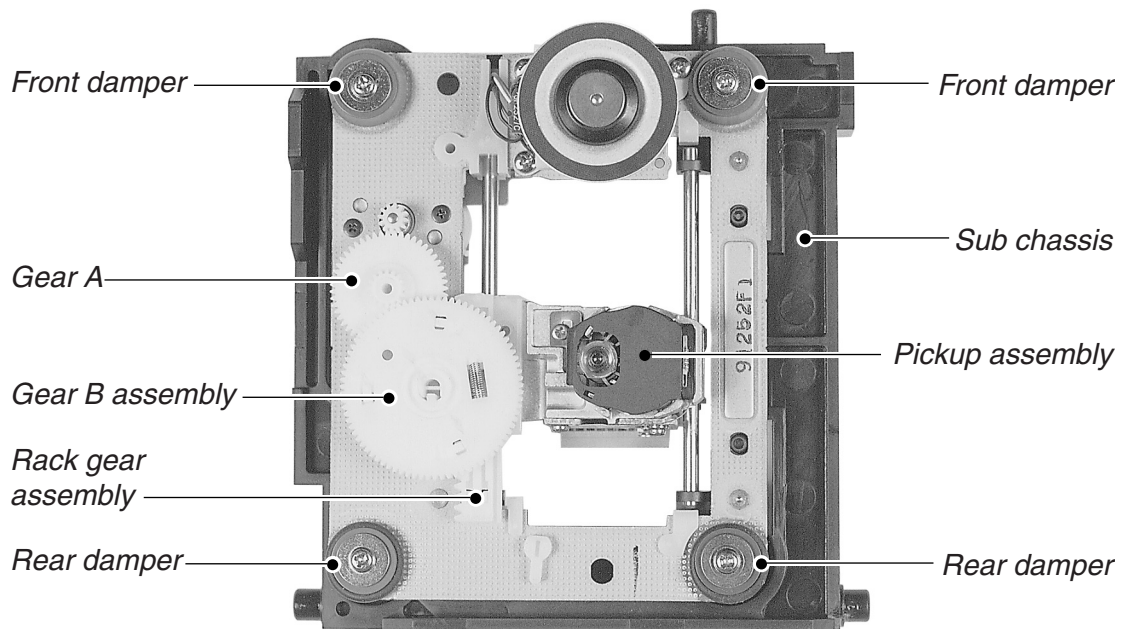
Pickup mechanism chassis assembly (Top side)
